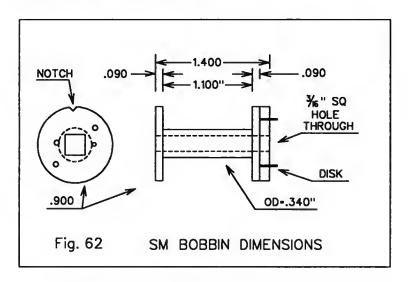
shows the bobbin dimensions. Prepare the disk and pins. Drill the cheek the same as for the SL. Install a loop of N0.28 wire in the - hole and wind four layers of No.28 wire. Wrap with two layers of typing paper and wind 12,000 turns of No.44.
